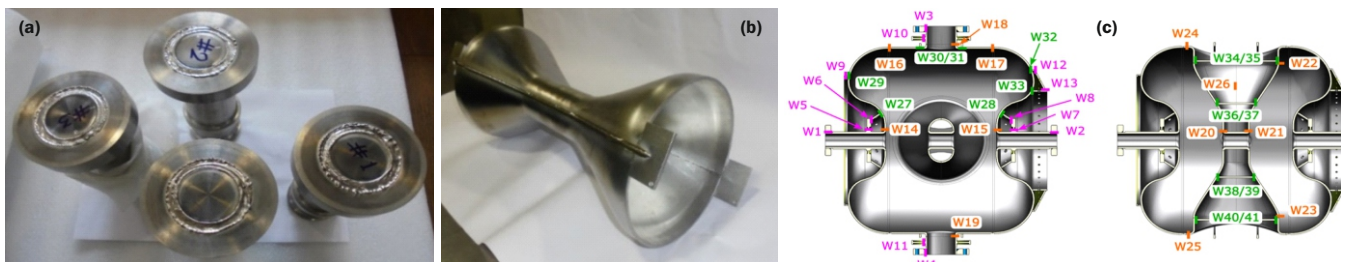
(a) Beam Pipe Sub-assembly. (b) Spoke Sub-assembly. (c) Cross Section View of 3-D CAD Showing All EB Welds.
